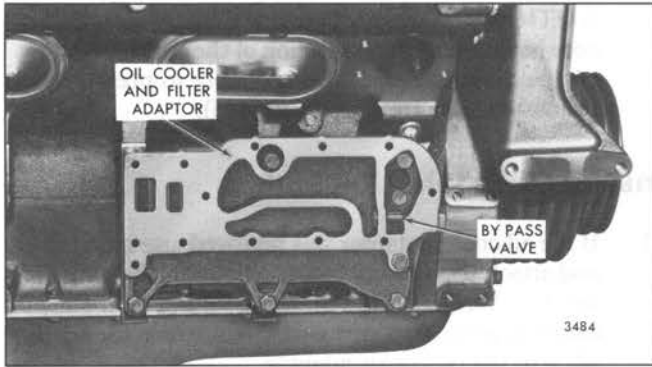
Oil Cooler Adaptor and Bypass Valve Mounting
